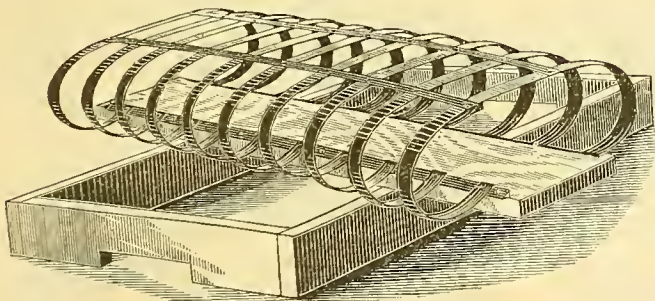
ELLIPTIC SEAT-SPRINGS AND CUSHION-FRAME.
